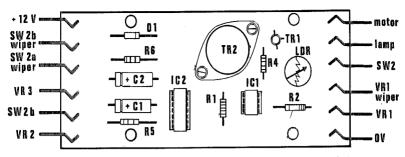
The printed circuit board viewed from the component side (reduced size  $\times$  0.061; original size  $148 \times 62$  mm).
